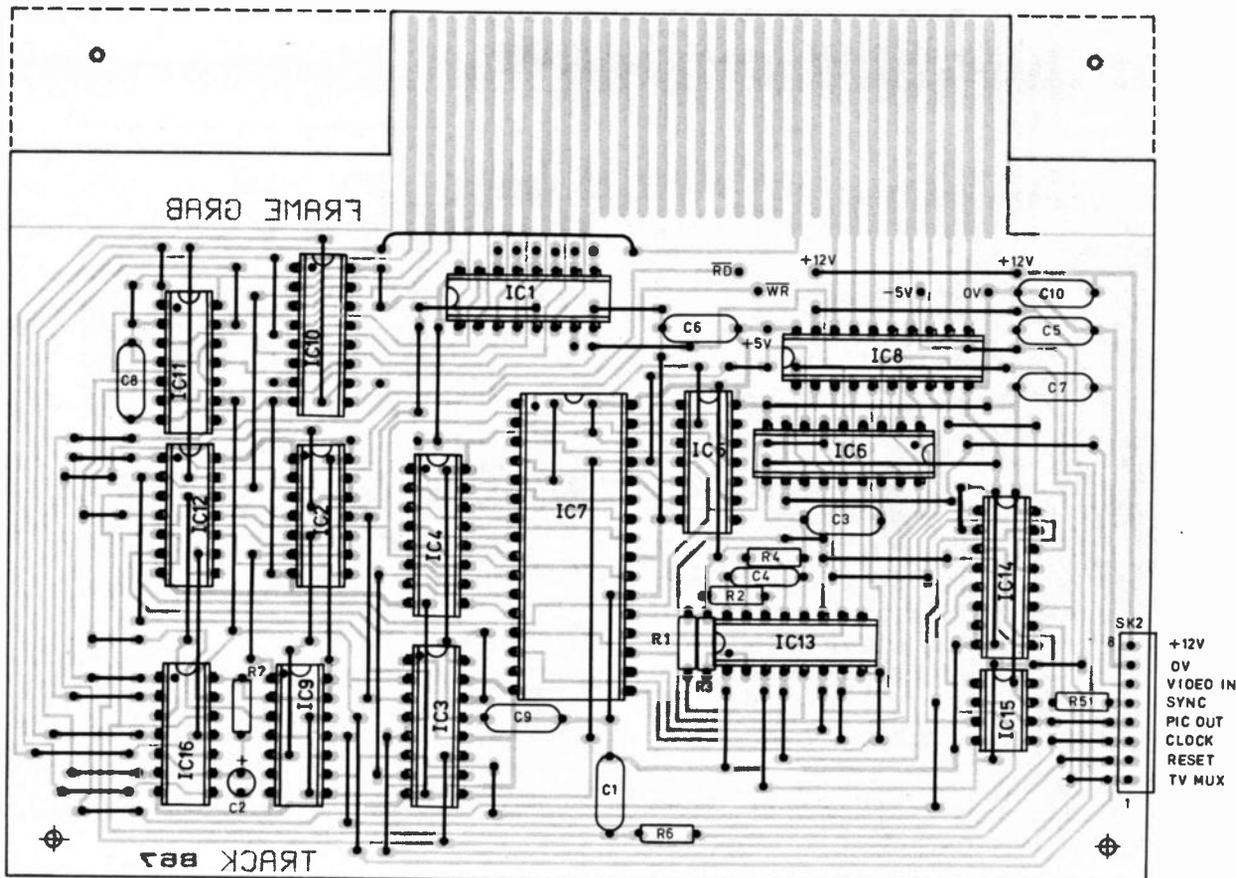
Printed circuit board component layout for the Frame Grab board. The layout above is for the single-sided prototype version and includes all necessary link wires. The component layout for the recommended double-sided board is identical, but without all the link wires.
